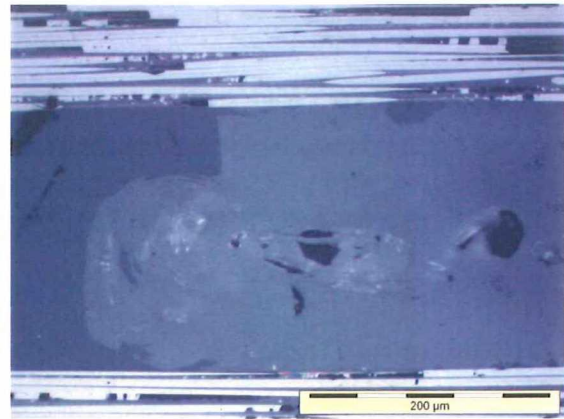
Squeeze flow of ED at the welding interface of a sample clip welded with 400 [J]. Only the lower layers of PEKK film have been in a molten state.
